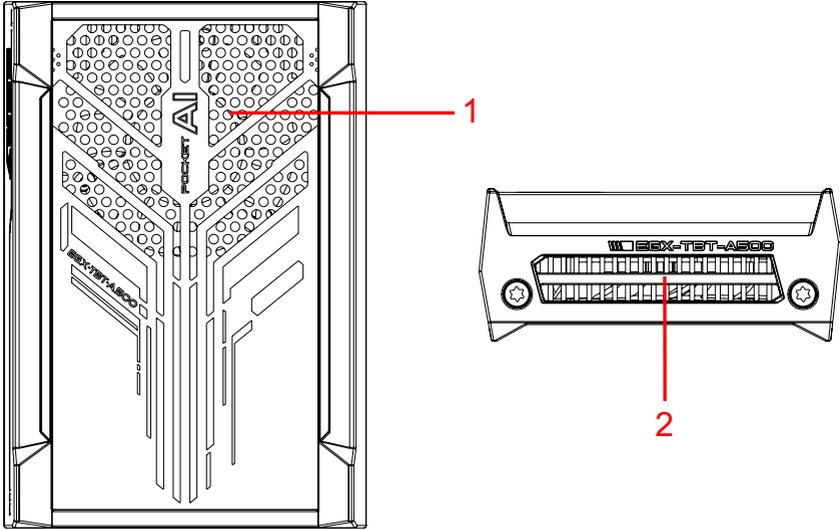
EGX-TBT-A500 Bottom and Back Views
